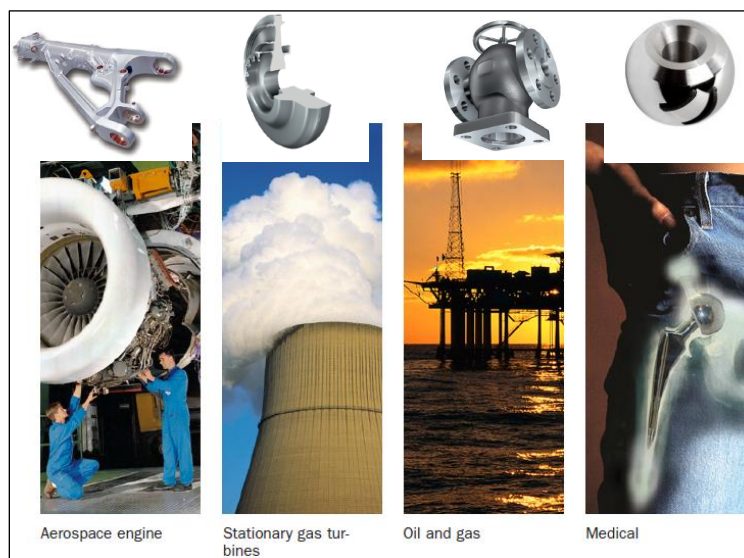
Some components manufactured using machine tools with application in different industrial sectors. From left to right: Landing gear, gas turbine disk, valve housing and femoral cap [Courtesy Sandvik Coromant]
